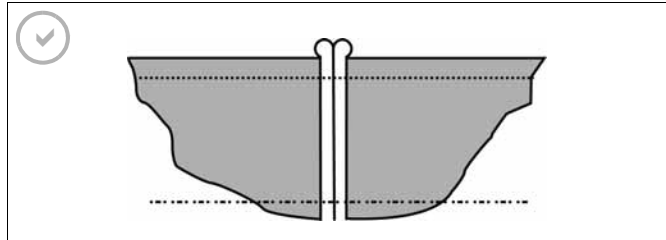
Butt-weld with welding beads that are too large but still acceptable.
